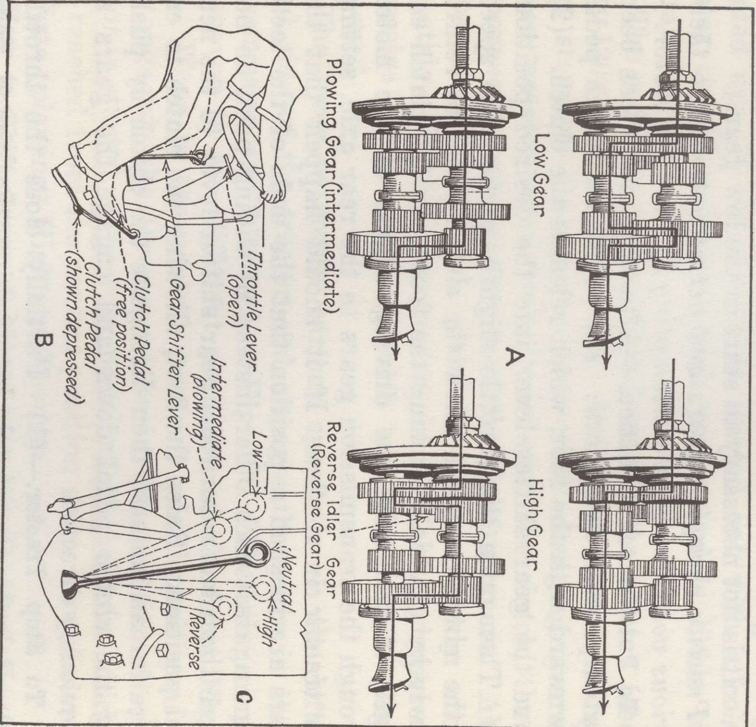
Diagram Showing the Various Combinations of Driving Gears to Obtain Different Speed Ratios and Course of Power Through Shaft and Gears at A. The Method of Operating the Clutch and Gear Shift Lever is Shown at B. Positions of the Gear Shift Lever to Obtain Various Speeds is Shown at C.
